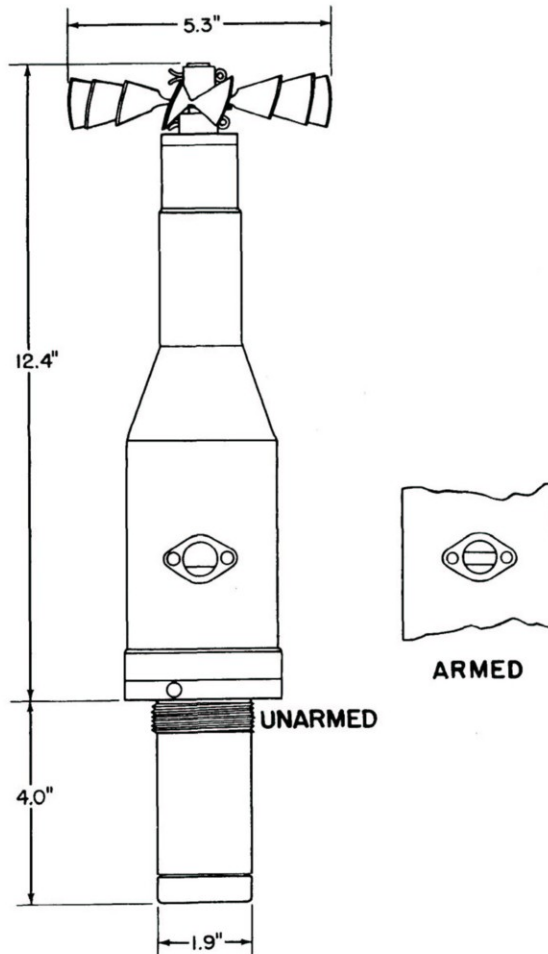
Outline Drawing of Tail Fuze AN-Mk 228
